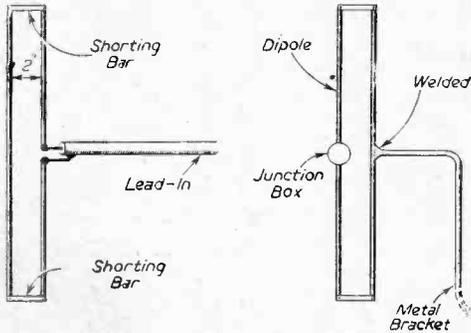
(left).—A simple method of making a folded dipole. Fig. 6 (right).—Welding the bracket.
